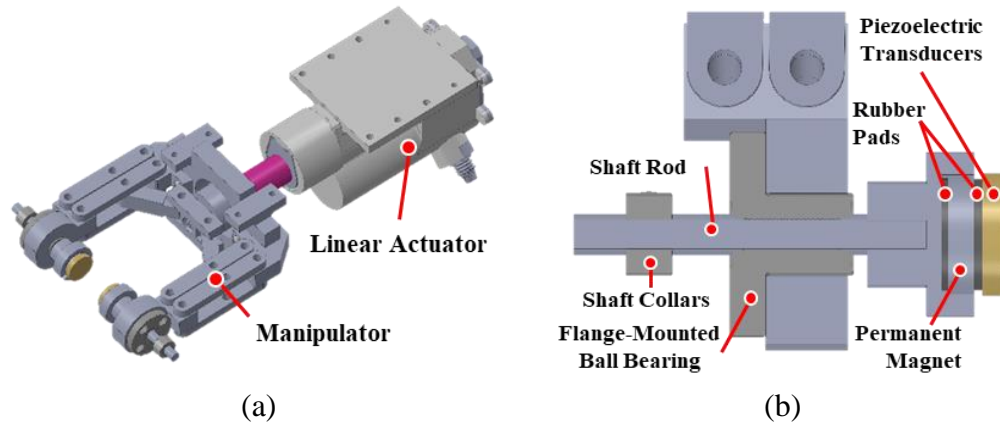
Design of a robotic sensing manipulator: (a) a manipulator integrated with piezoceramic transducers; (b) a cutaway view of the transducer assembly.
